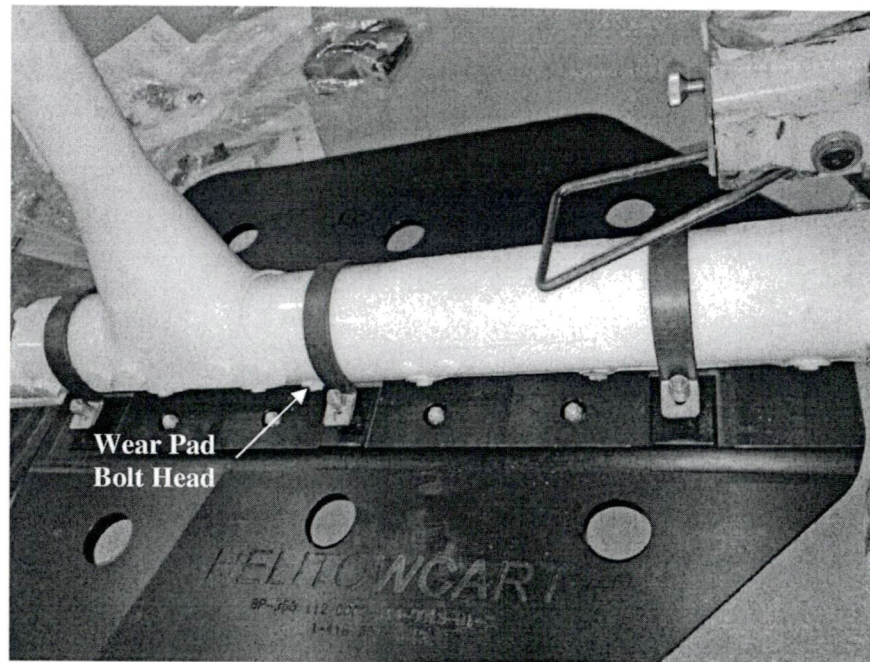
BearPaw BP350 Installed with Dart Wear Pads
